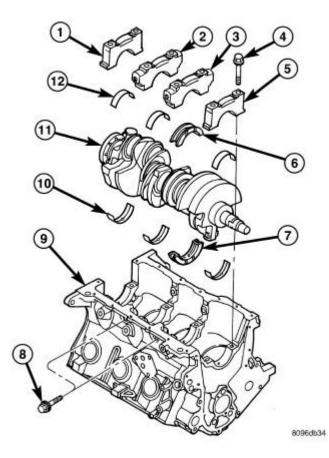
Identifying Crankshaft & Main Bearing Caps Courtesy of CHRYSLER LLC
